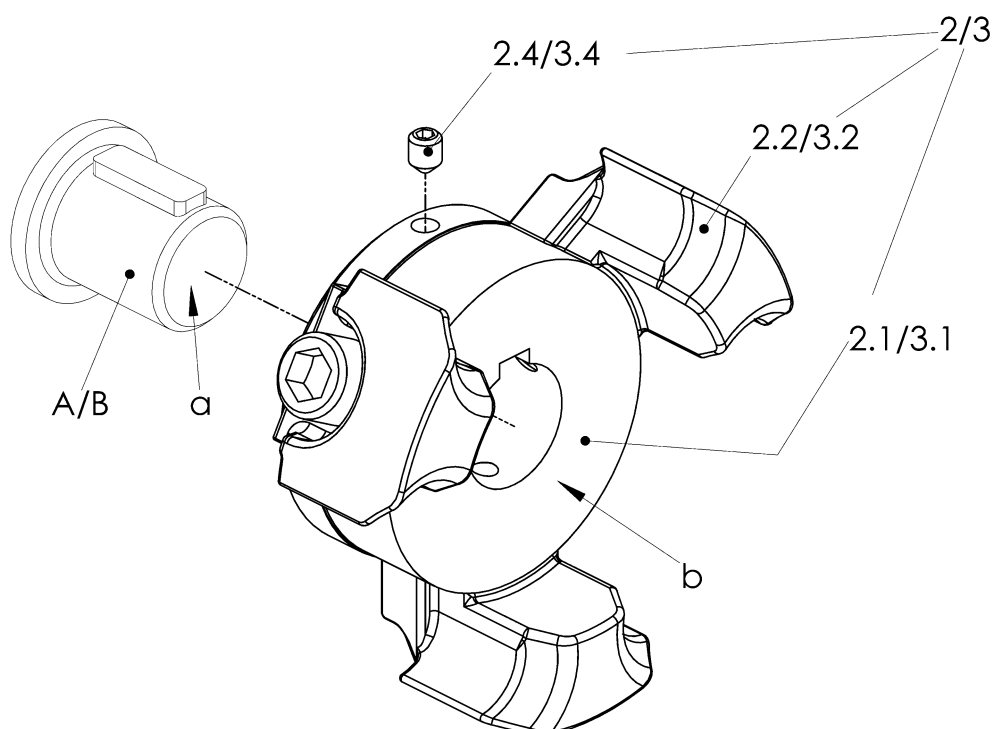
Mounting the hub assembly (2/3) with cylindrical bore and keyway
